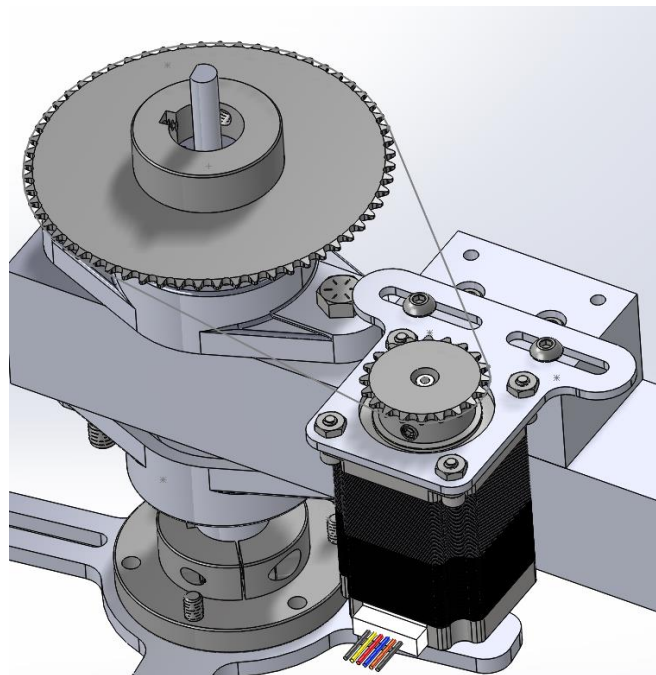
Slip Angle Drive Motor/Sprocket Interface
